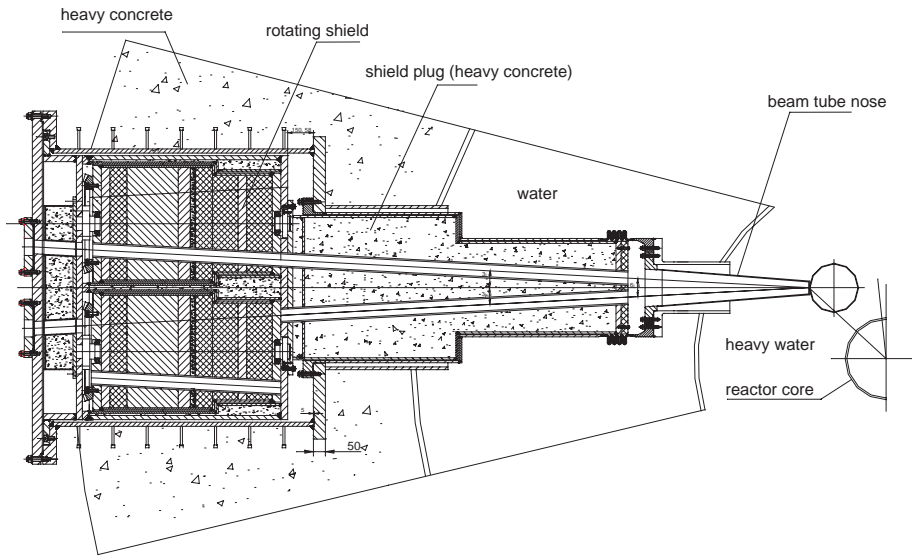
Cross-section of a typical beam tube (for HT3, HT6, HT7 and HT9).
